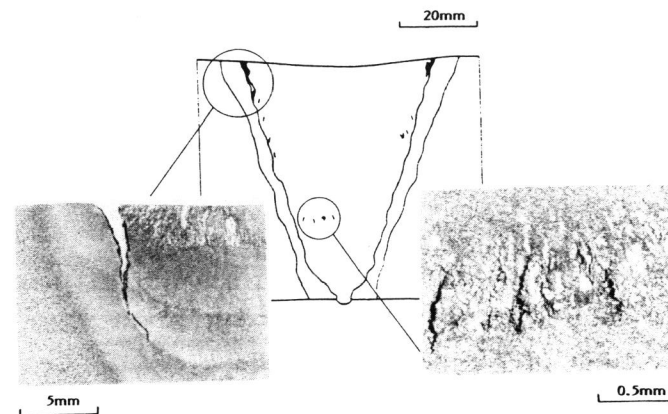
The distribution of cracking in the mild steel weldment and its macro/microscopic appearance.
